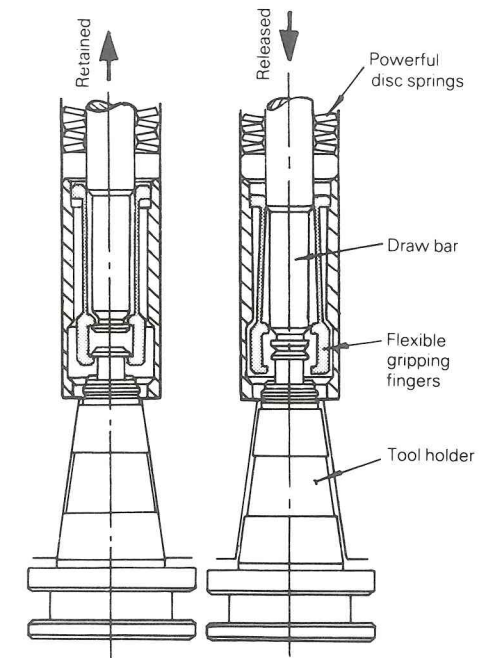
Hydraulic-mechanical draw bar assembly used on machining centers.
